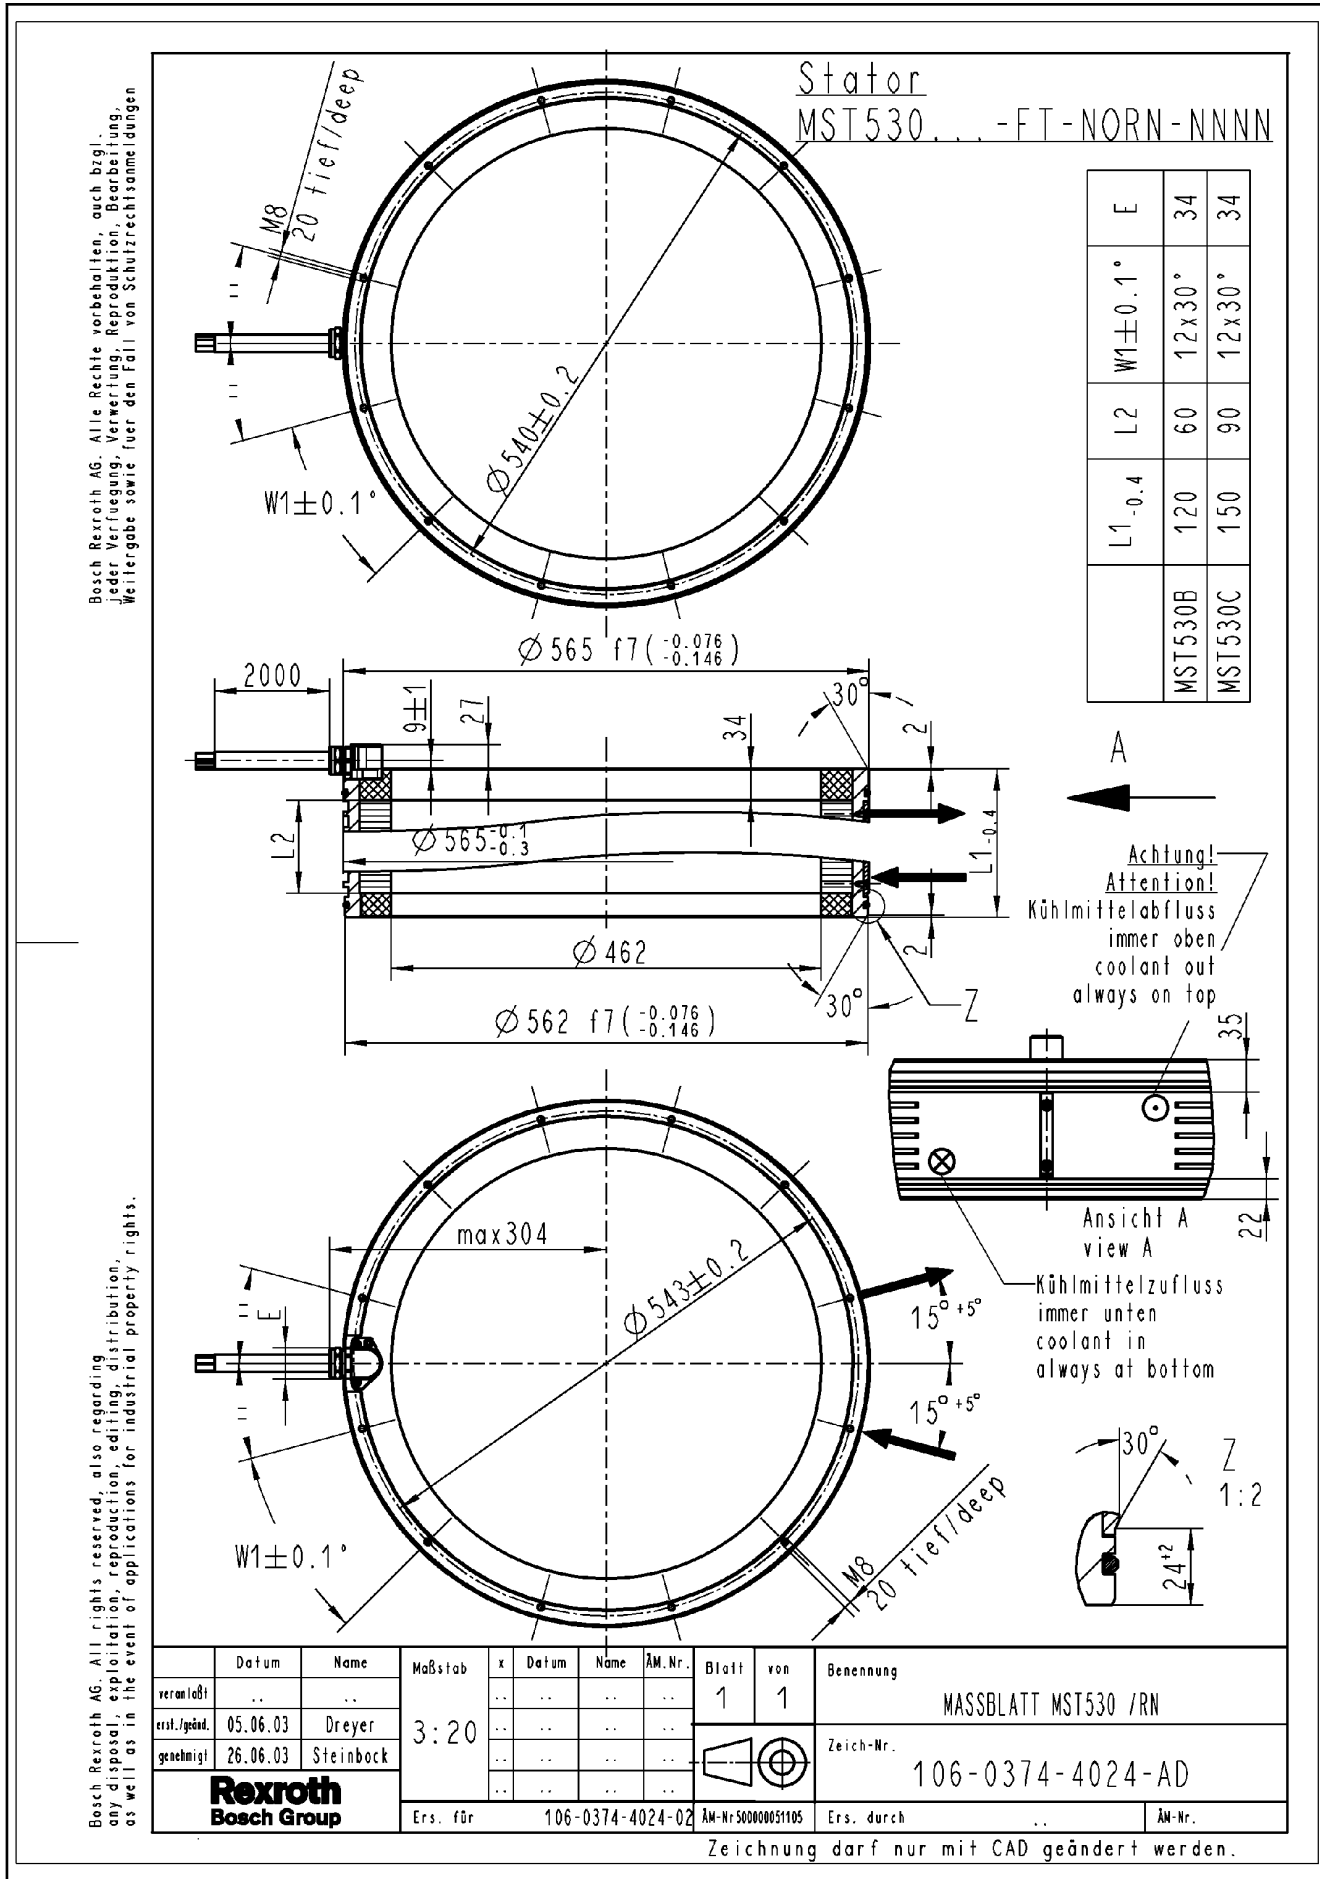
Dimension sheet MST530, electrical connection "RN"
